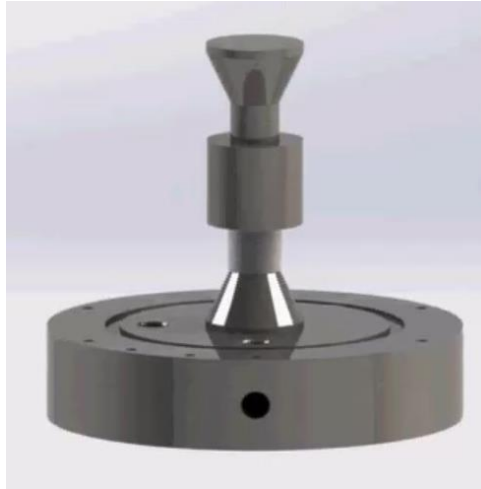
Representation of uniaxial steel die used in hot pressing shown mounted on a steel base
